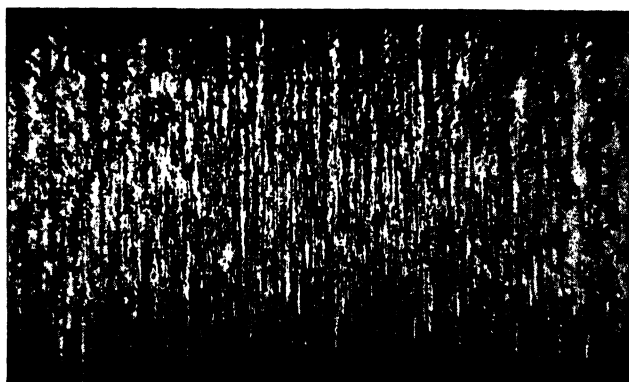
EXAMPLES OF FAULTY SURFACE FINISH
